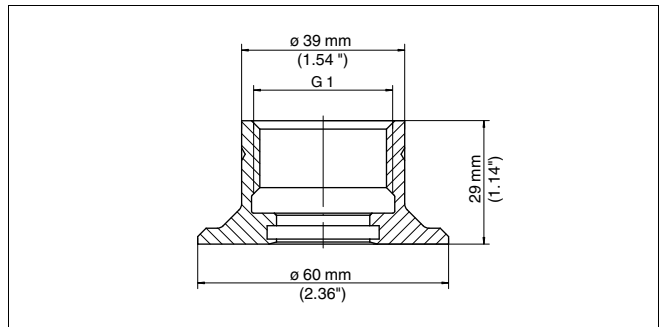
Dimensions welded socket G1 A acc. to DIN 3852-X
